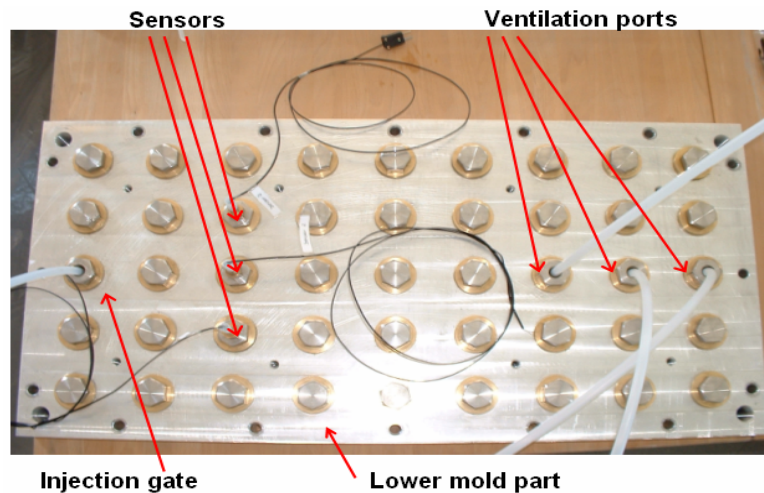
Bottom view of the lower mold part. There are 45 multi-functional bolts on the mold part. In this injection, 1 injection gate, 3 ventilation ports, and 3 sensors are used, and all the other multi-functional bolts are used as solid (i.e., no function).
